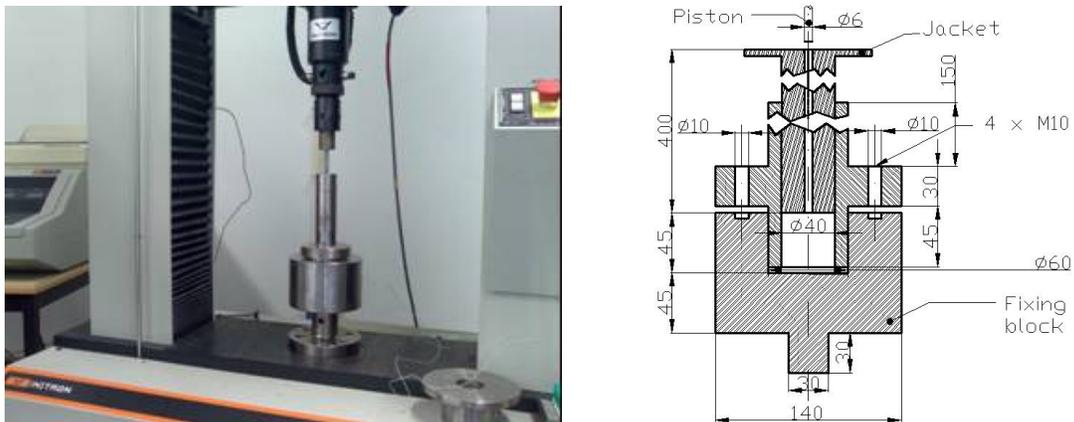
Instron machine and drawing sectional view of the pellet compression chamber.
